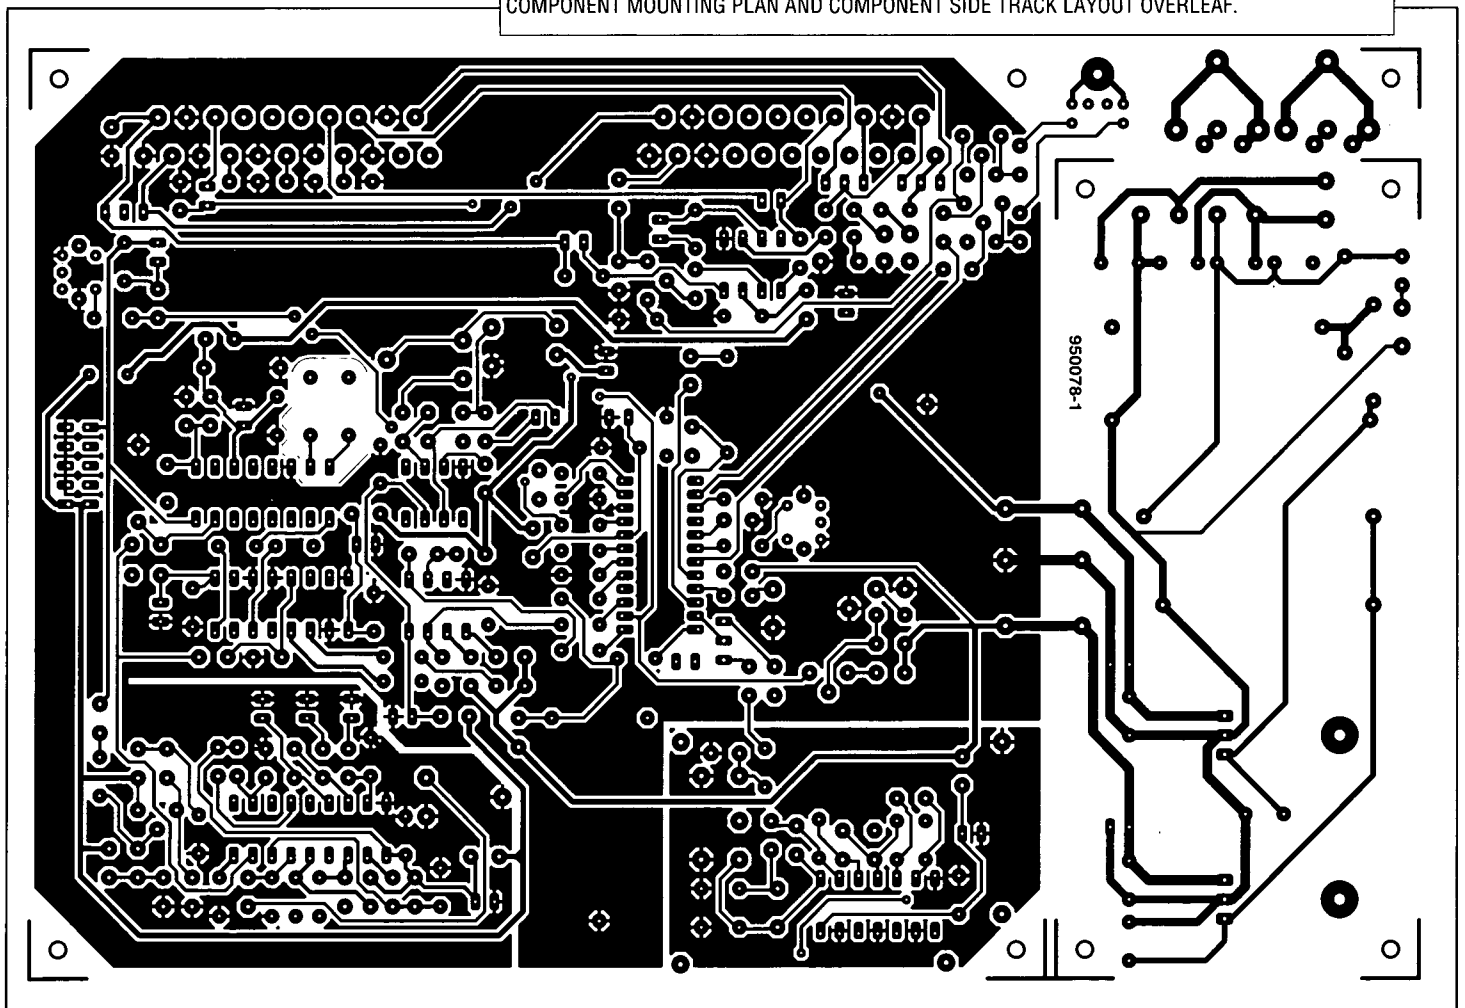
The printed circuit board has the same size as that of the PIP processor, and offers more than enough room for all components. If desired, the power supply section, IC₉, IC₁₀, etc., may be cut off (board available ready made through the Readers Services, see page 70).
